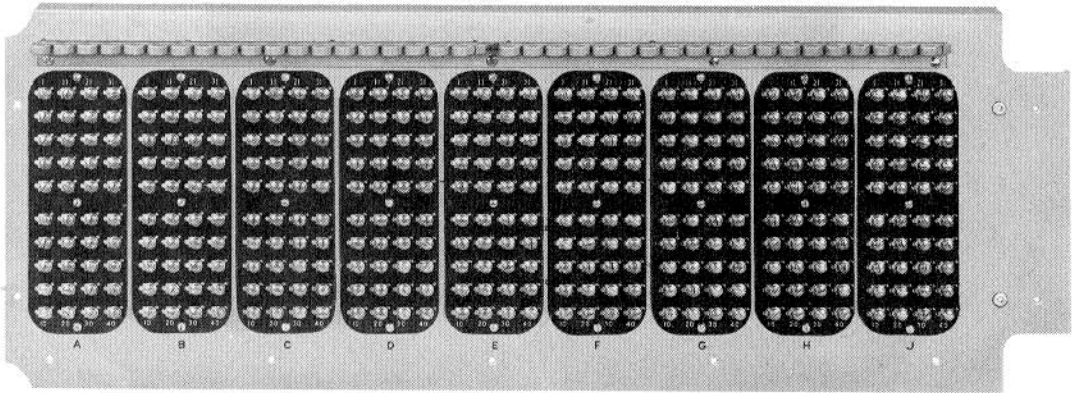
Terminal Plate Assembly per ED-69366-50, Group 3
